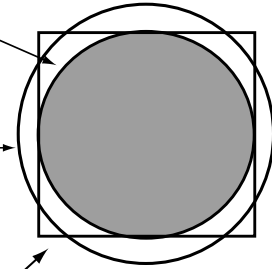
Footprint - 3 mils stencil - solder mask defined
